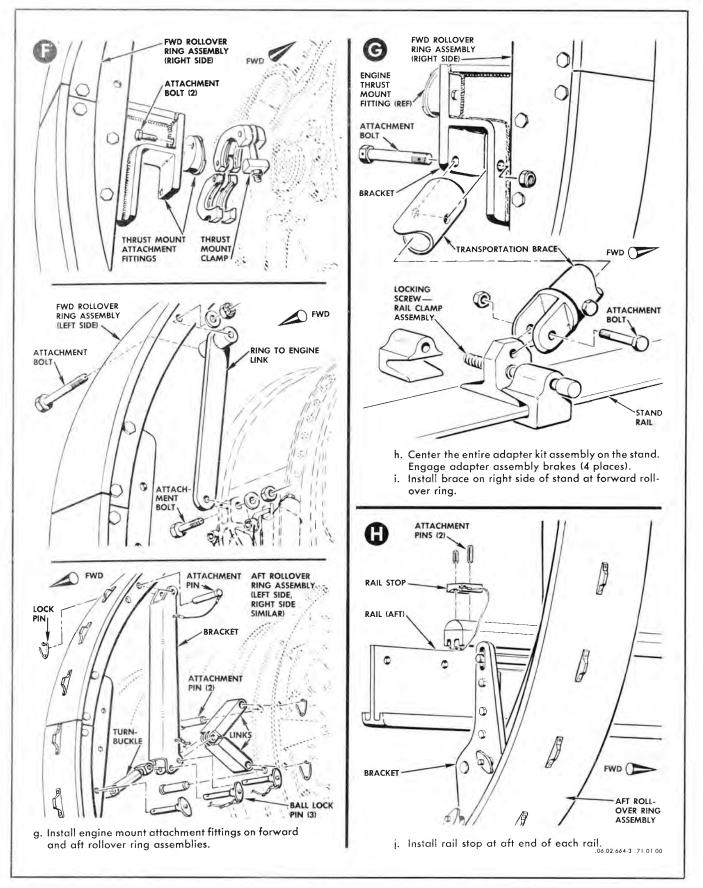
Engine Stand Preparation, Type USAF ETU-8/E Using Adapter Kit 8-96165 (Sheet 3 of 3)
